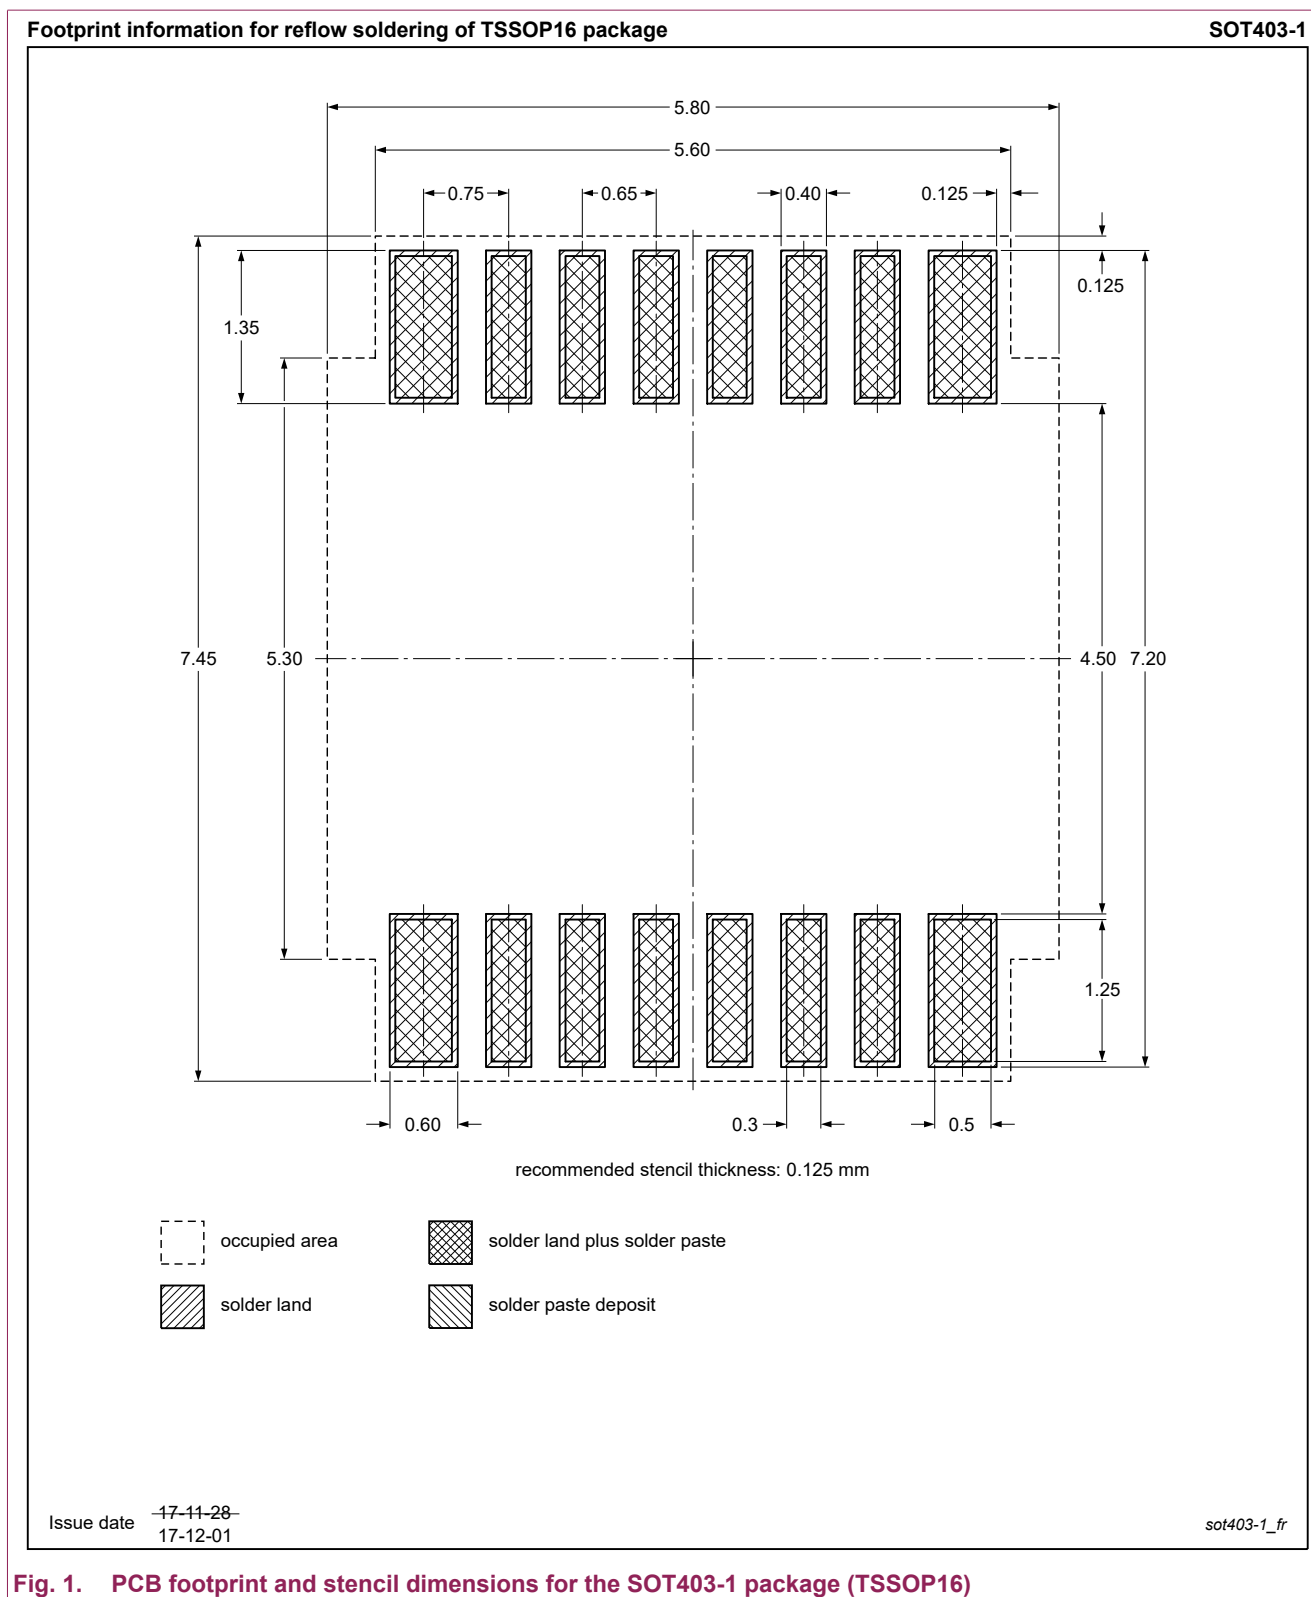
PCB footprint and stencil dimensions for the SOT403-1 package (TSSOP16)
